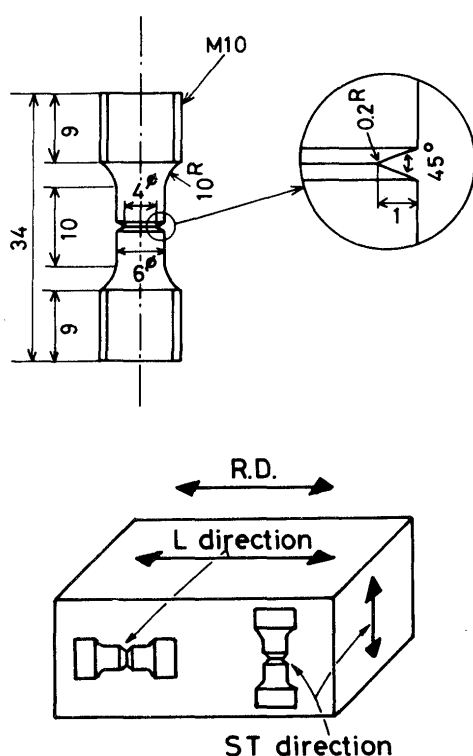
Design, and positions of extraction for specimen with V notch used in SCC test
